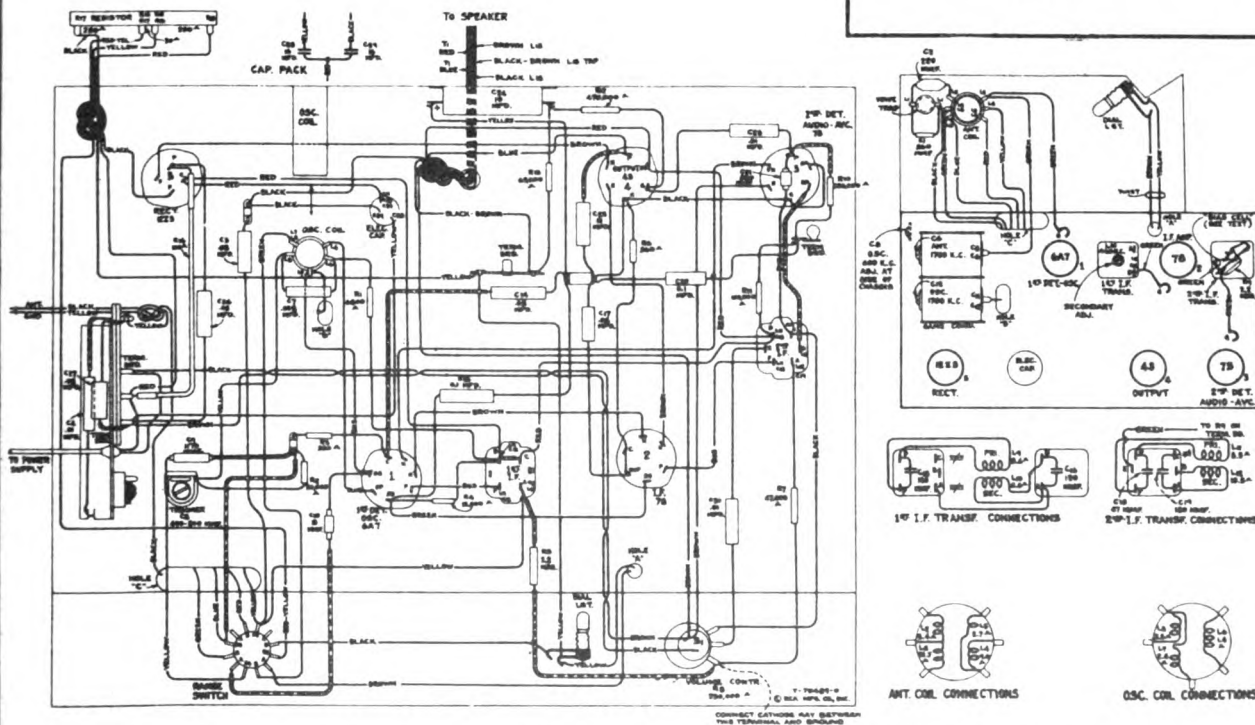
Chassis Wiring Diagram, Radiotron, Coil, and Trimmer Locations
